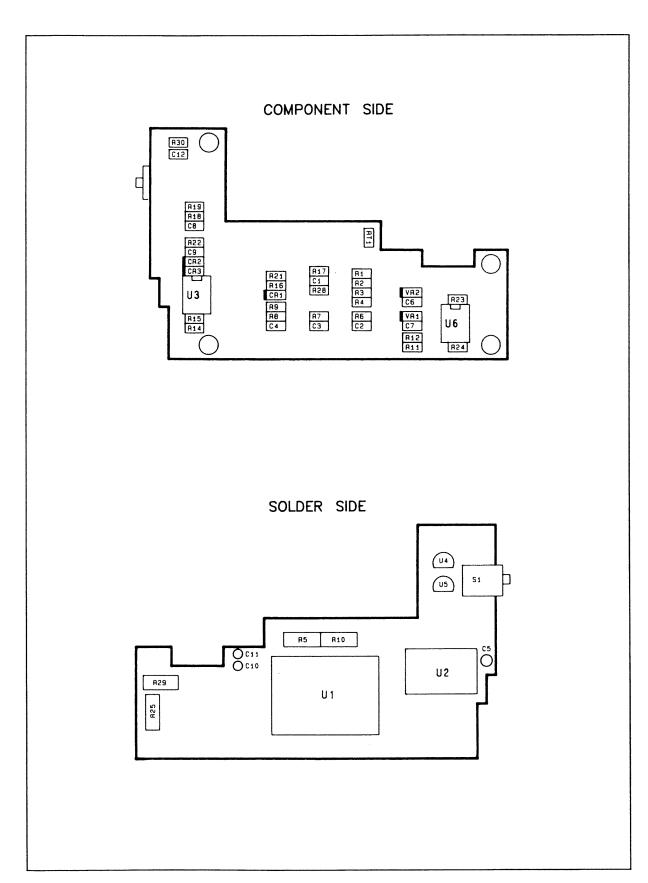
A2 Preamplifier Assembly Component Location Diagram
